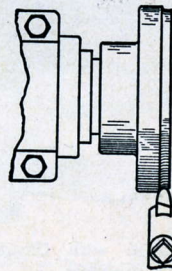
Turning the diameter of the flange of the Chuck Plate on the spindle of the lathe
